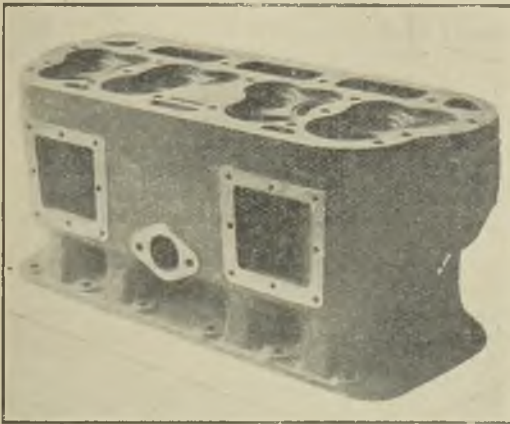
AUTOMOBILE ENGINE BLOCK.
